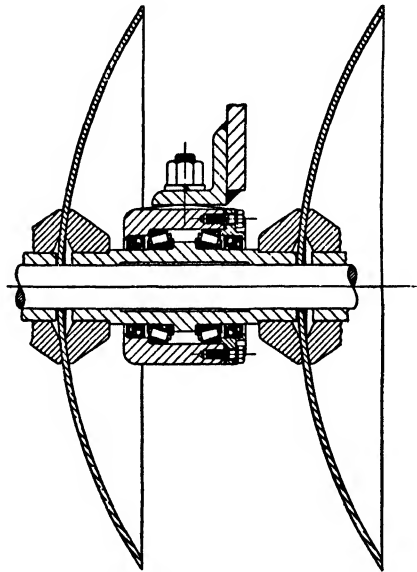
Application of tapered roller bearings on a disk harrow. (Timken Roller Bearing Company.)
